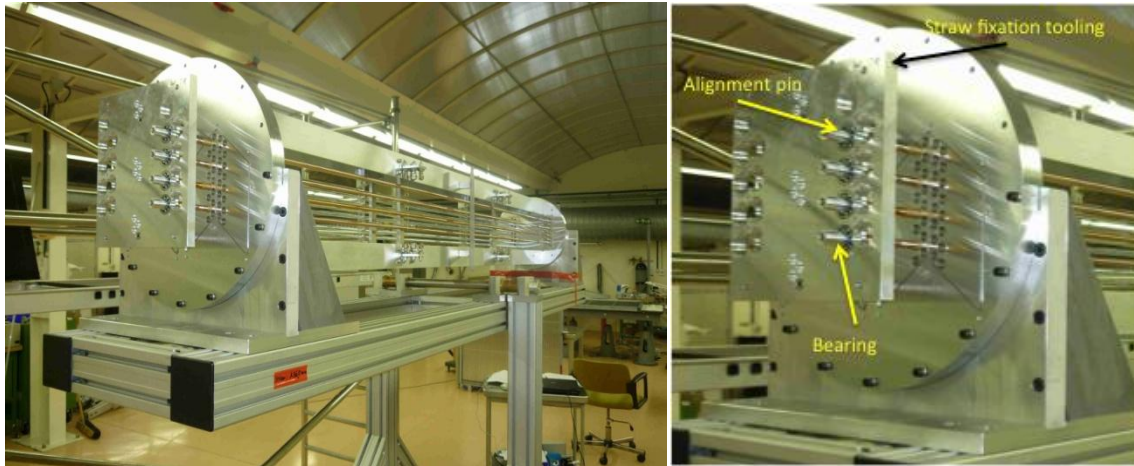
The prototype in the assembly tooling in horizontal position (left) and the straw fixation tooling (right).
